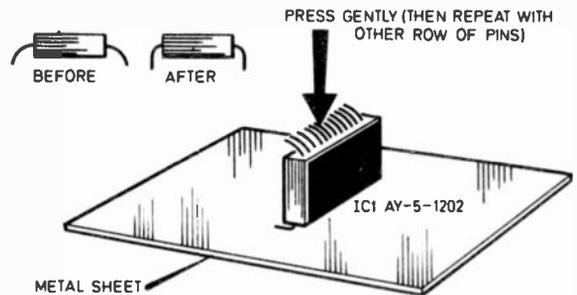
(above). Method of bending the i.c. pins to fit the socket.
